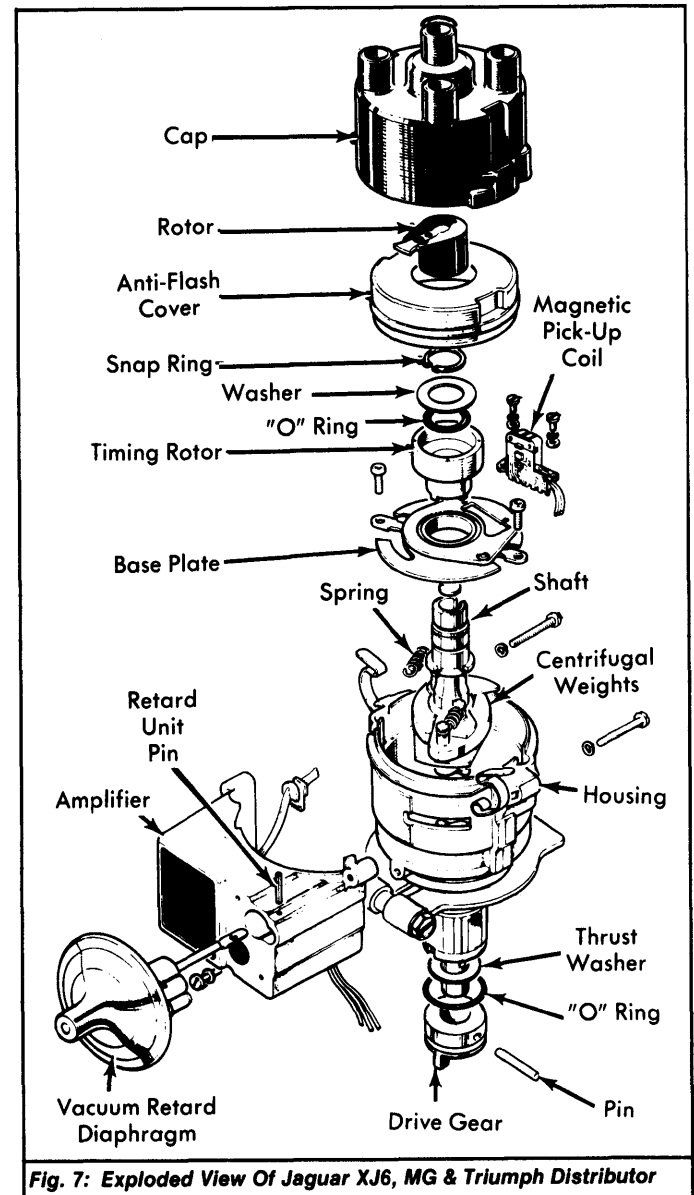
Exploded View Of Jaguar XJ6, MG & Triumph Distributor
